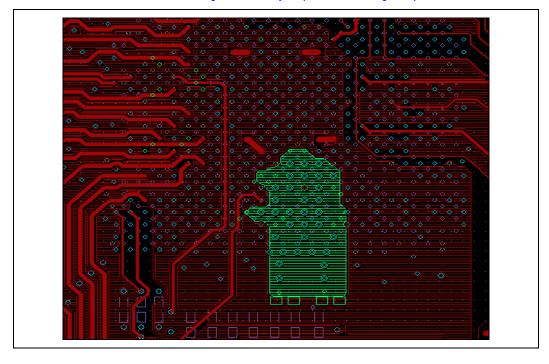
Customer Reference Board Layout Example (Bottom – Layer 6)
